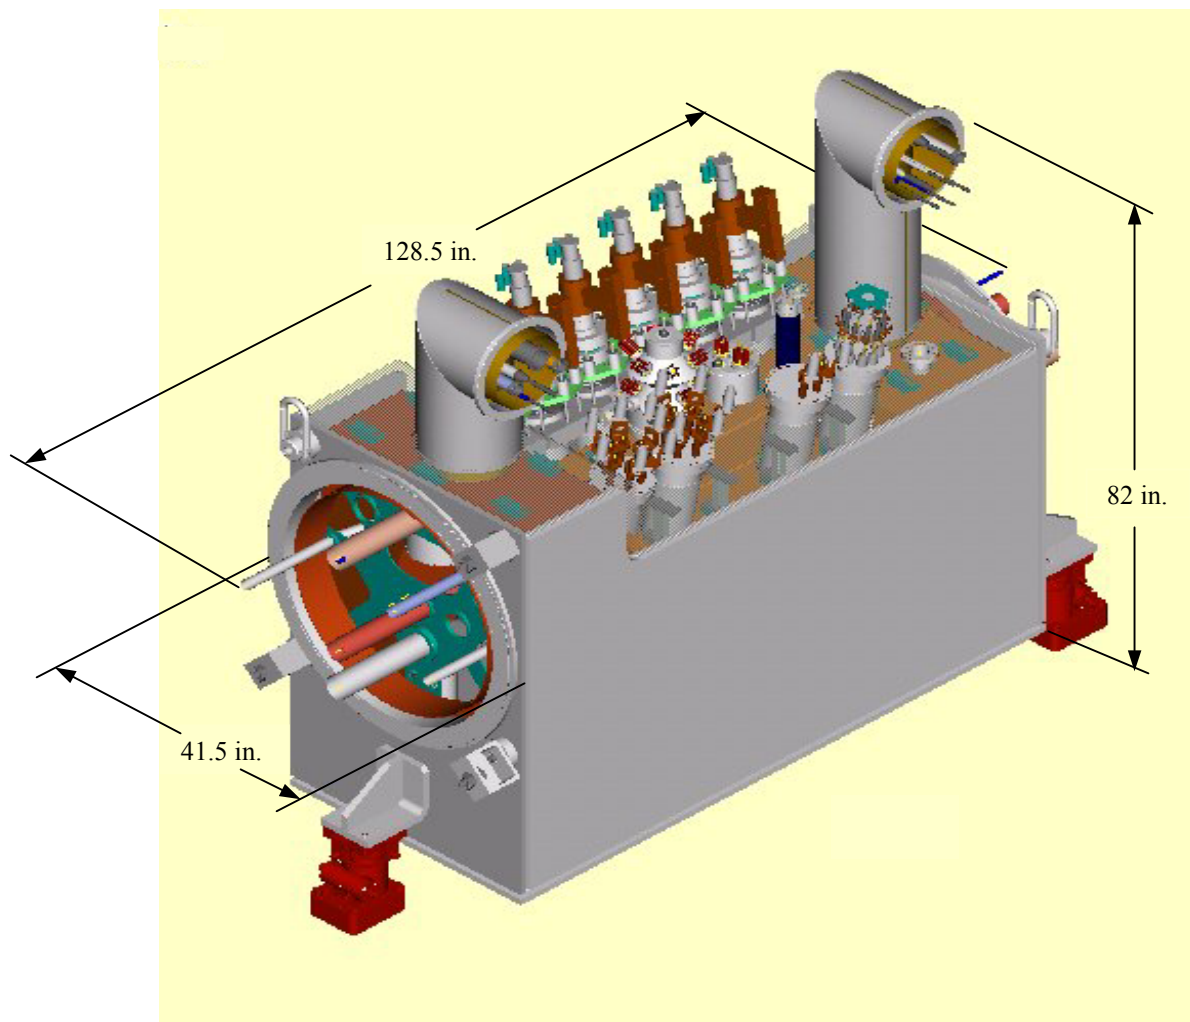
Illustration of the DFBX Assembly Showing Maximum Dimensions (jacks not included)
